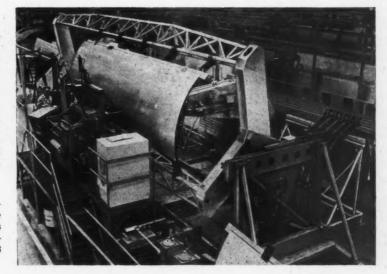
Drivmatic automatic riveting machine installed in the Douglas plant for riveting fuse-lage panels for DC-8
